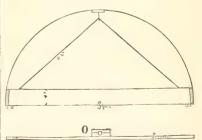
Showing Construction of Paddle-Box. O, Crank-bearing fastened to Frame, as shown in Fig. 1.
